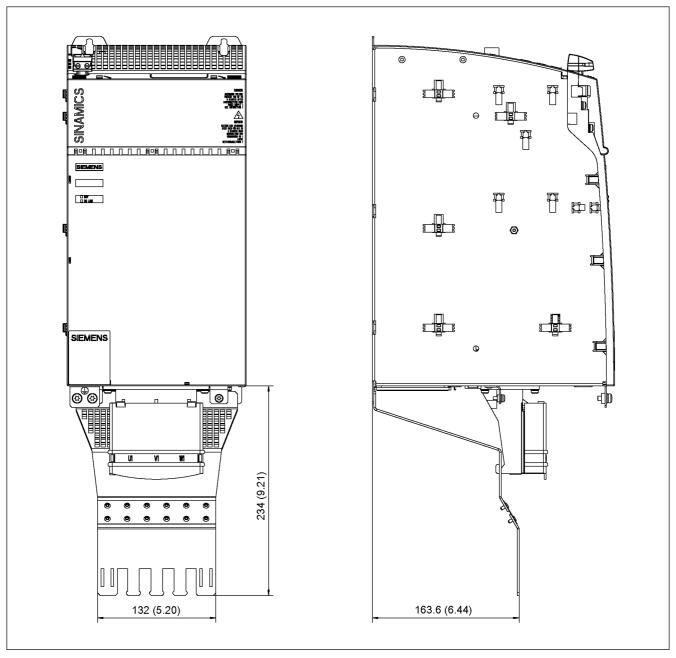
Dimension drawing of shield terminal plate on a 200 mm component (Line Module or Motor Module) with internal air cooling
